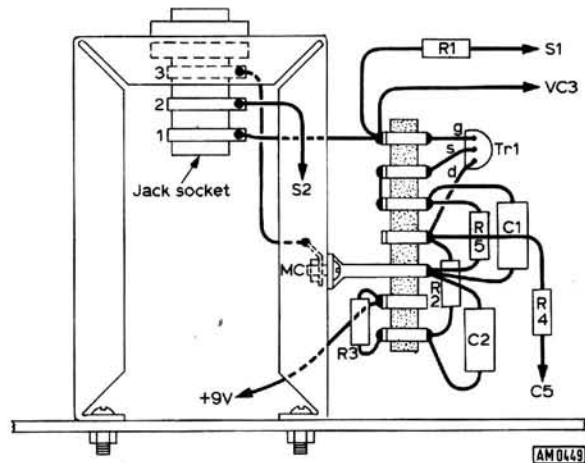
The mounting for the rotating aerial, and the tag strip that holds the RF stage, is constructed from a Universal chassis flanged runner and bent to fit.
